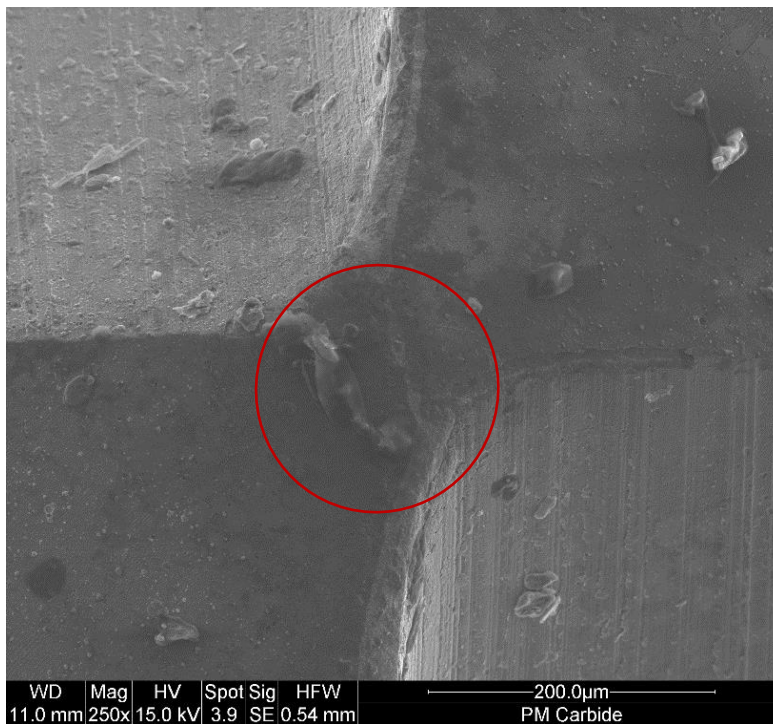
250x SEM top down view of the chisel edge of the carbide drill bit after drilling 60 holes in PM titanium.
